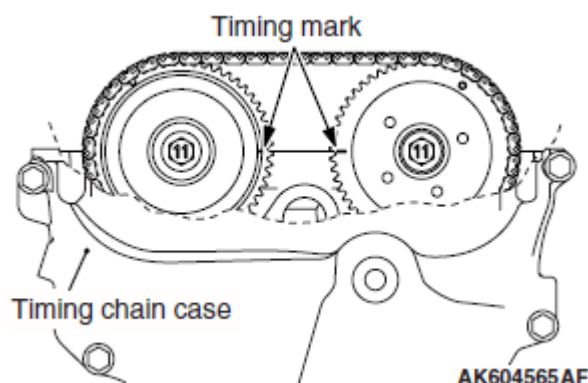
Aligning Timing Mark Of Camshaft Sprocket
